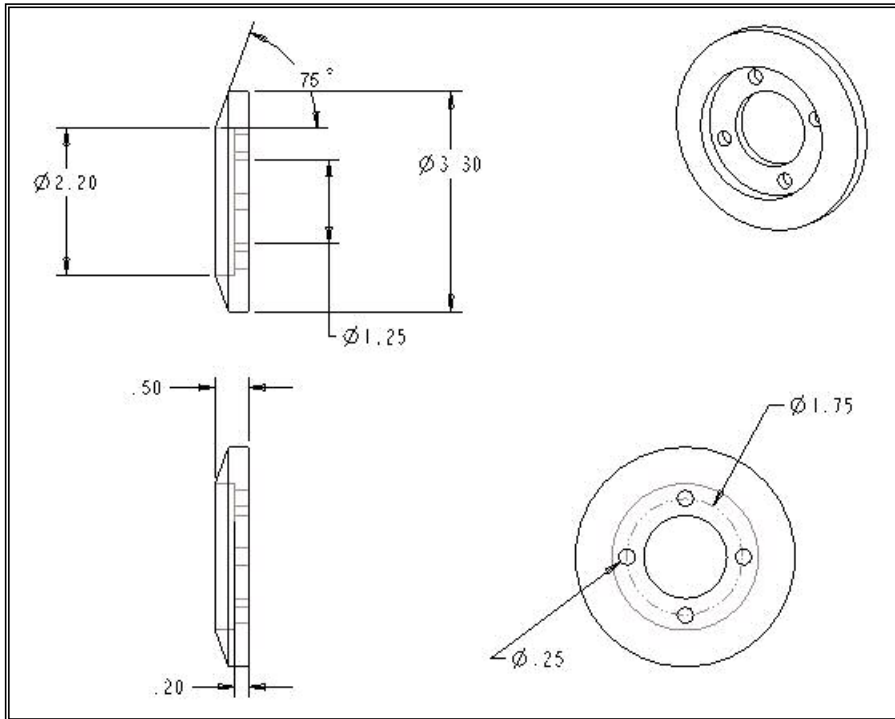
Multiview drawing of the spindle with dimensions
